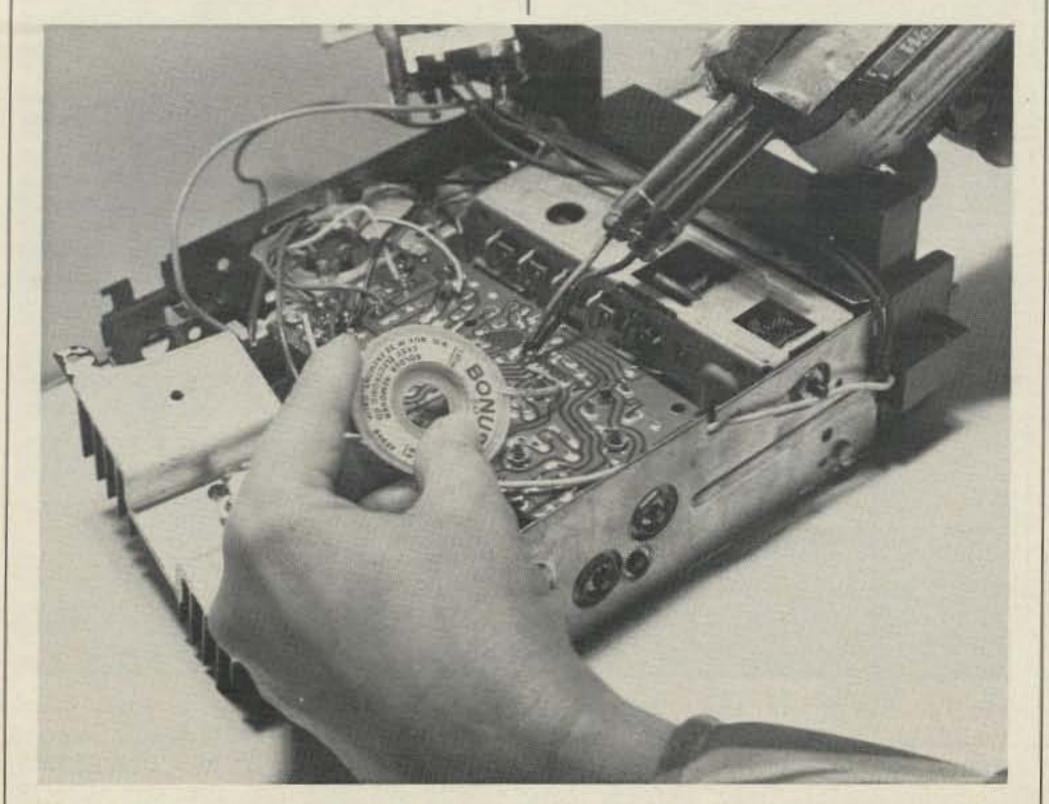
Excessive solder may be removed from the transistor terminal with solder-wik. Simply apply the gun tip to the braided material and the excess solder is sucked and picked up.
